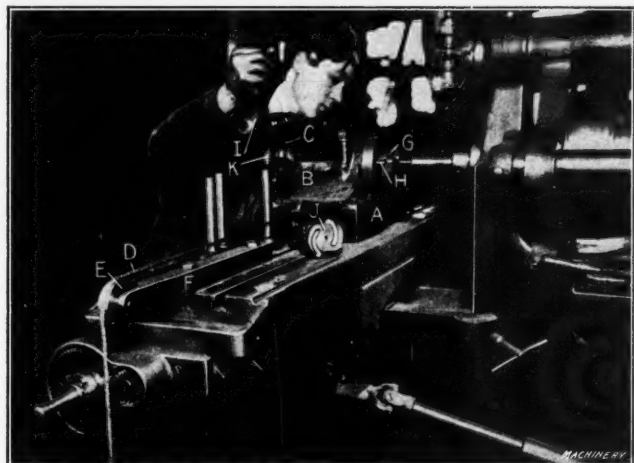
Fixture for milling Half-nut Operating Cam Grooves
